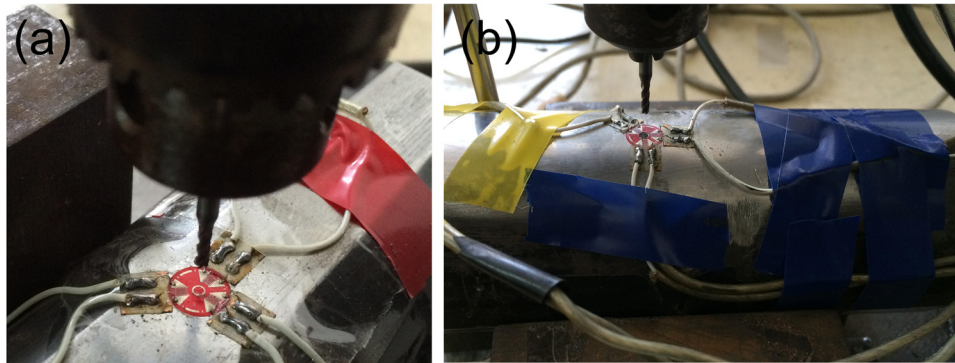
Residual stress measurement set up: (a) before drilling & (b) after drilling.
